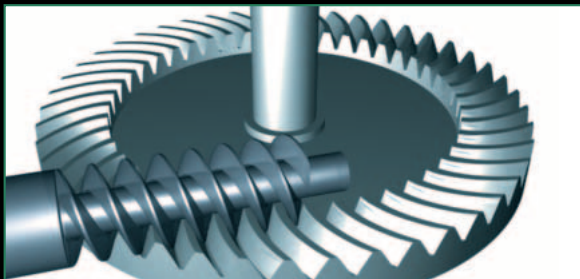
DDS model of worm face gear cut in AutoCAD.
